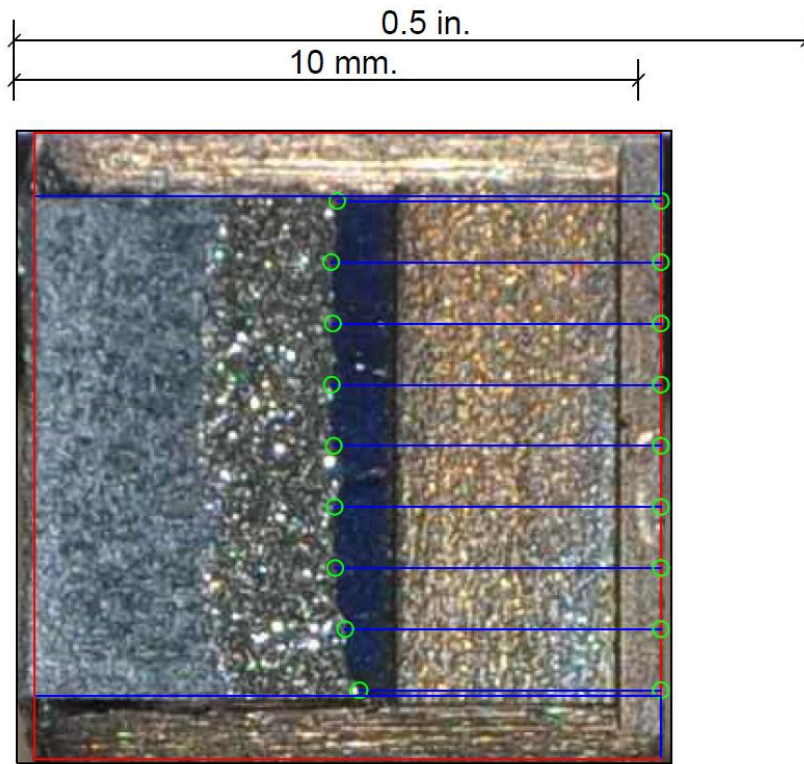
Specimen B10' Fracture Surface
